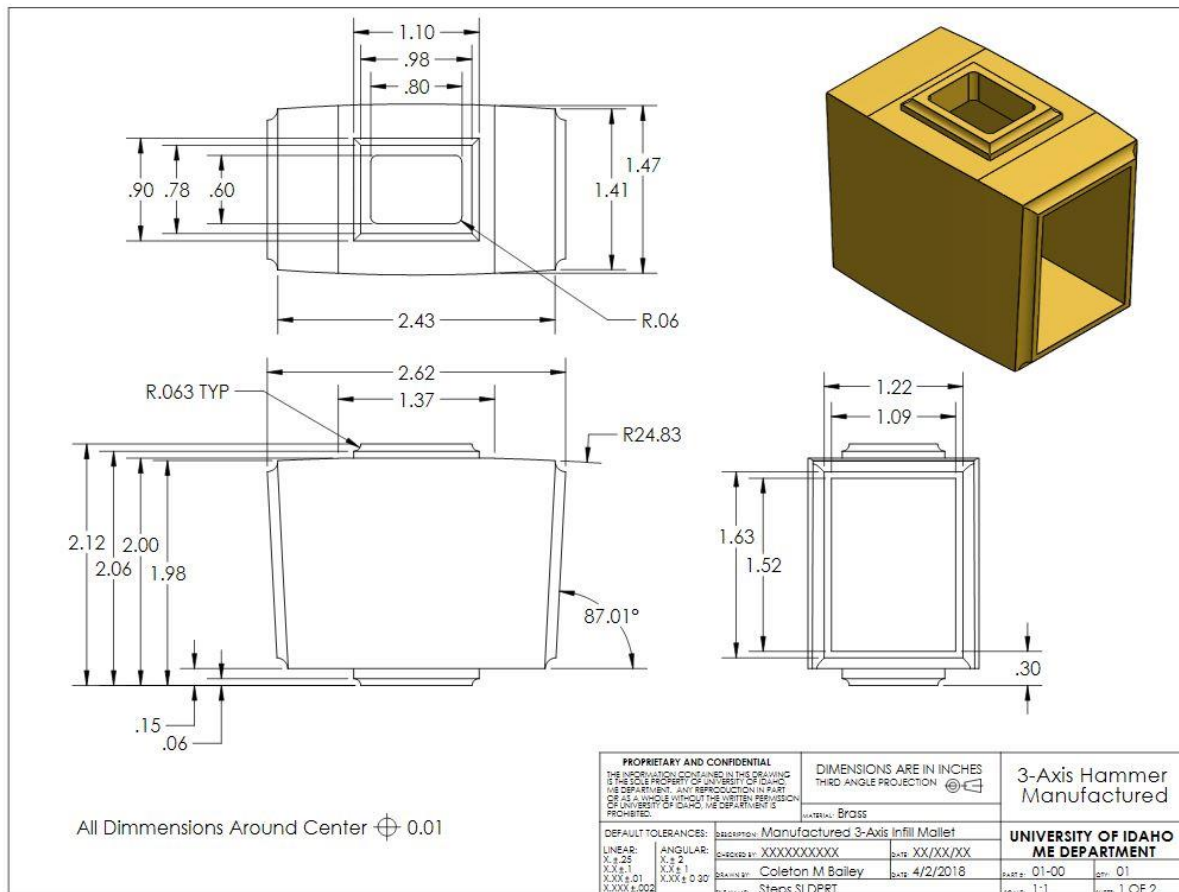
A drawing of the 2.5-axis hammer head that was manufactured to prove the concept of manufacturing the infill mallet with subtractive methods.
